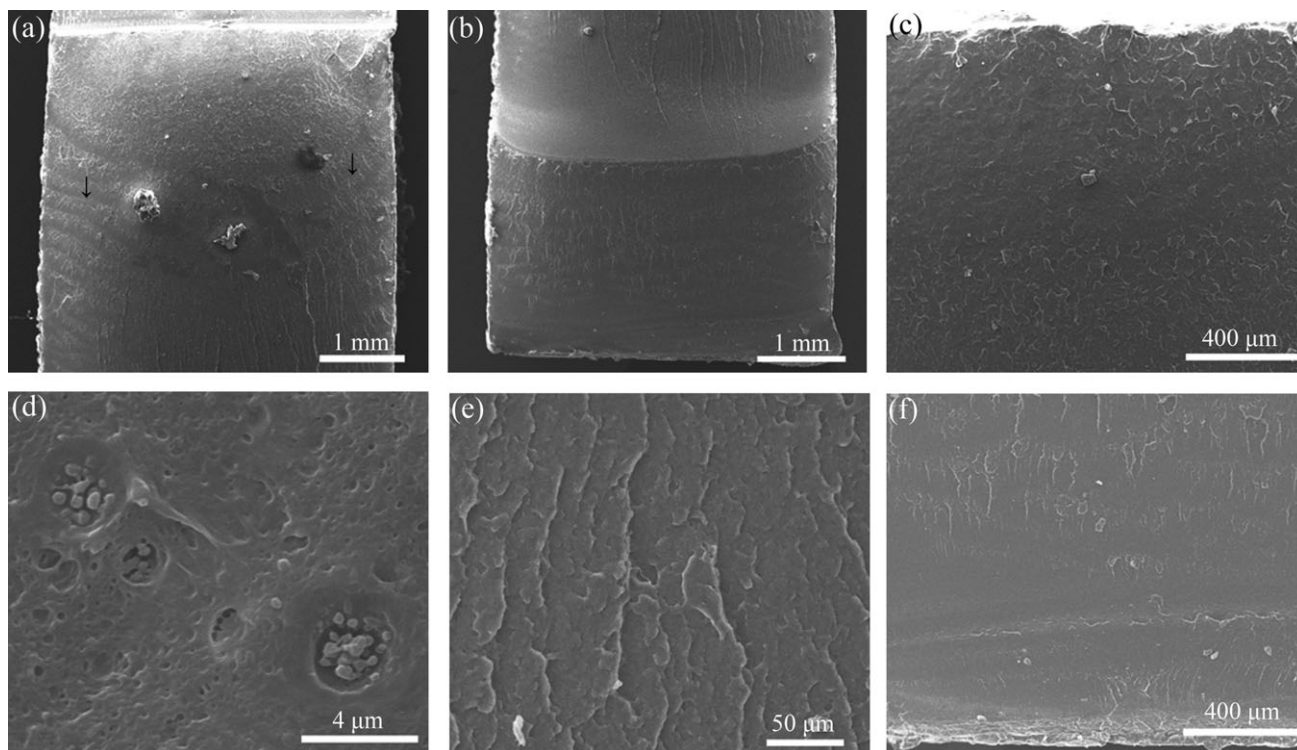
Photomicrographs of the fracture surface of ABS-2: (a) upper half section, (b) lower half section, (c) zone I, (d) upper section of zone II, (e) lower section of zone II, and (f) zone III.
